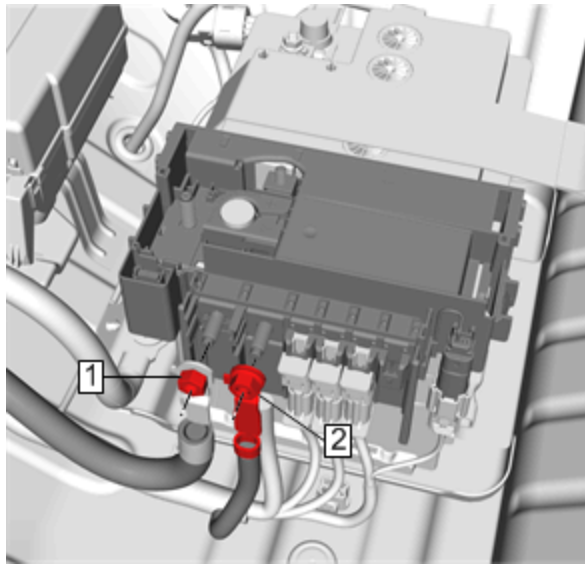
Battery Positive Cable Junction Block Nut And Body Wiring Harness Nut
